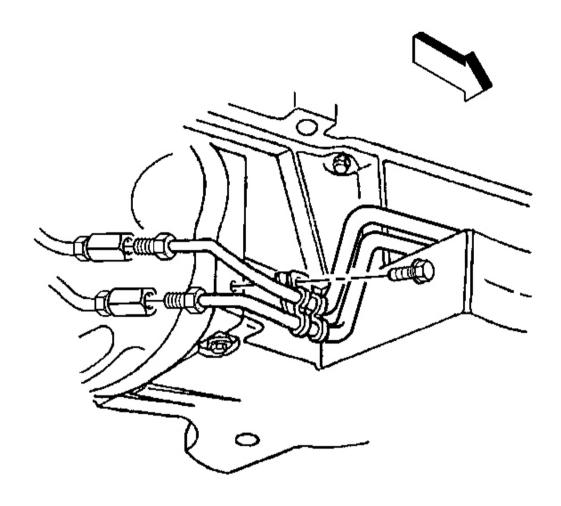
Locating Cooler Fittings Courtesy of GENERAL MOTORS CORP.
